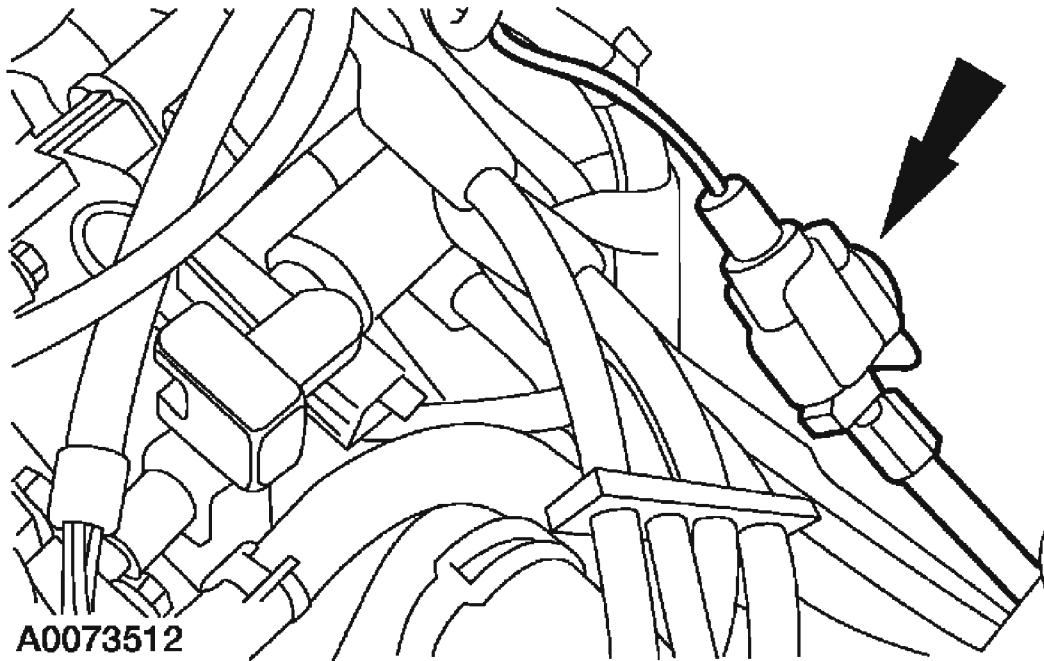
Disconnecting Starter Motor Solenoid In-Line Electrical Connector
